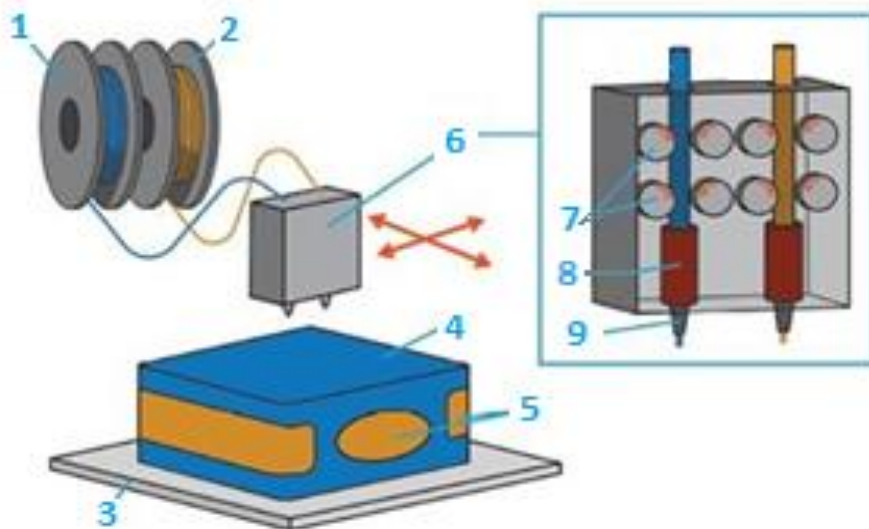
Elements present in double extruder nozzle FDM: (1) material coil for model printing; (2) support material coil; (3) printing base; (4) model; (5) support structures; (6) extruder; (7) gears; (8) blenders; and (9) extruder nozzles. Adapted from [35].
